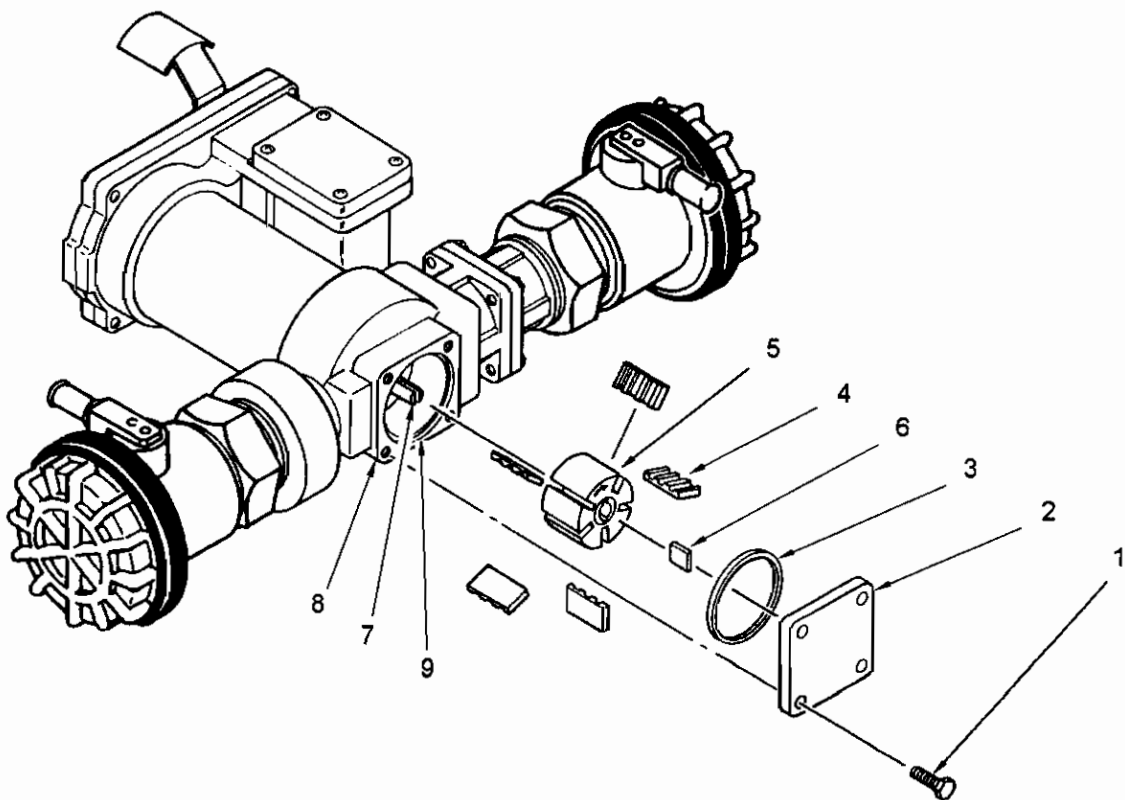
Auxiliary Pump Rotor Vane Replacement
